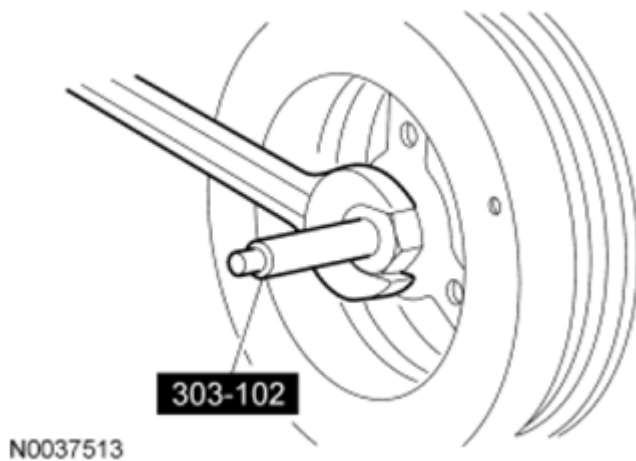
Installing Crankshaft Pulley Using Crankshaft Vibration Damper Installer
